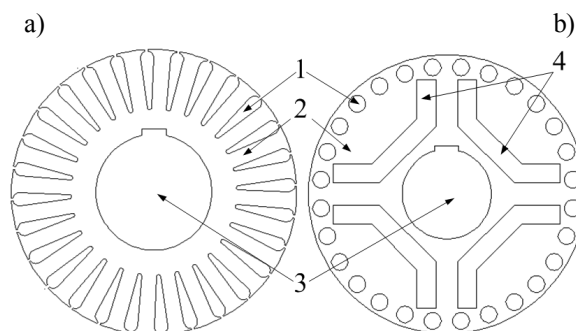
Cross section of rotor a) IM, b) LSPMSM (1 - cage winding, 2 - rotor core, 3 - shaft, 4 - magnets)
